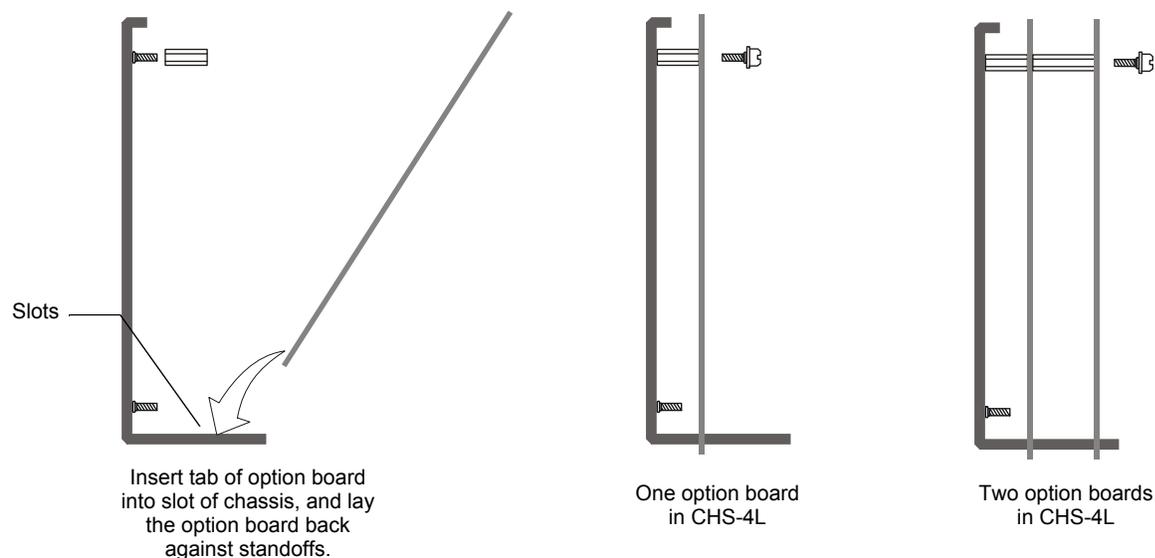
Mounting an Option Board in a Chassis (CHS-4L Shown)
